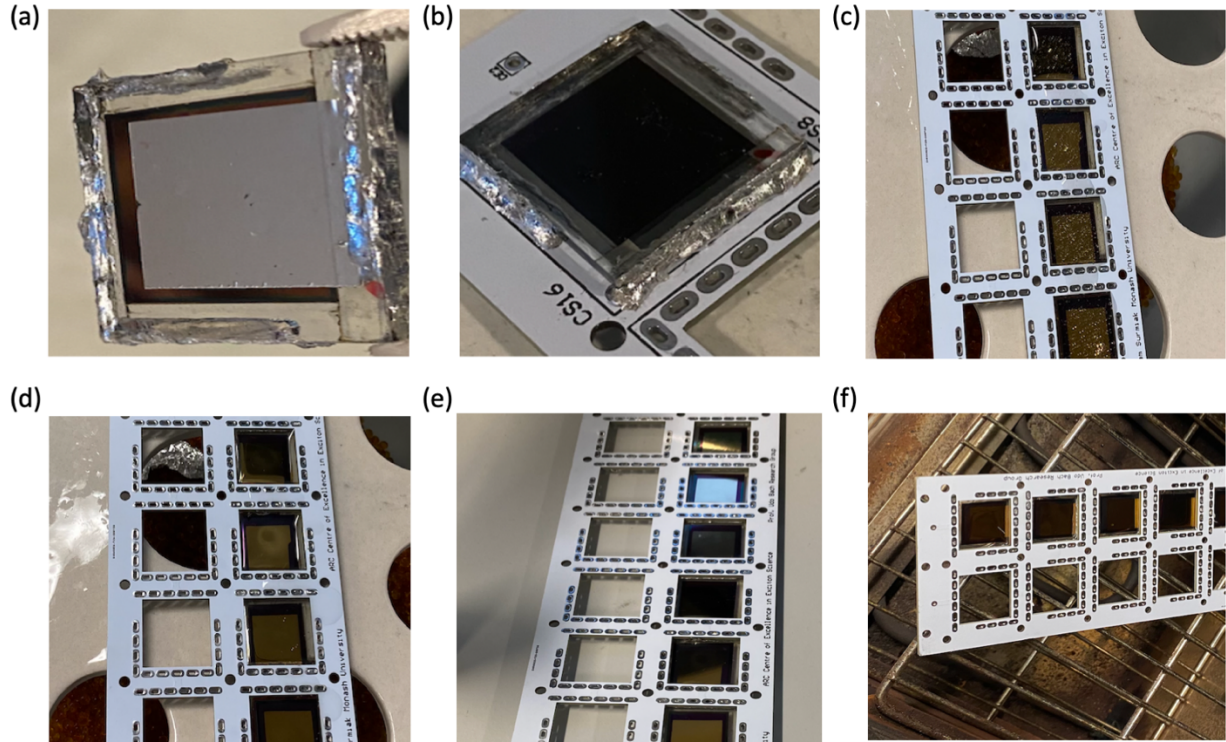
Modular design for the data acquisition, 8 solar cells in one rung in series connection. (a) Top and bottom electrodes are soldered and solder is distributed around the edges (ultrasonic soldering iron is required to solder to glass edge) (b) the solar cell is placed in the position and soldered around, (c) the pre-mixed PDMS with curing agent is casted on the soldered rung of 8 devices, the PCB board together with top of the solar cell creates a small cavity that is filled with PDMS, (d) the mixed, uncured casts in the cavities are placed into vacuum dome for vacuum treatment (removes air bubble, allows the PDMS to penetrate into the FR4 PCB boards through the cutout edge), (e) the vacuum dried PDMS-filled modules are cured in the electric oven for 60 minutes at 50 °C.
